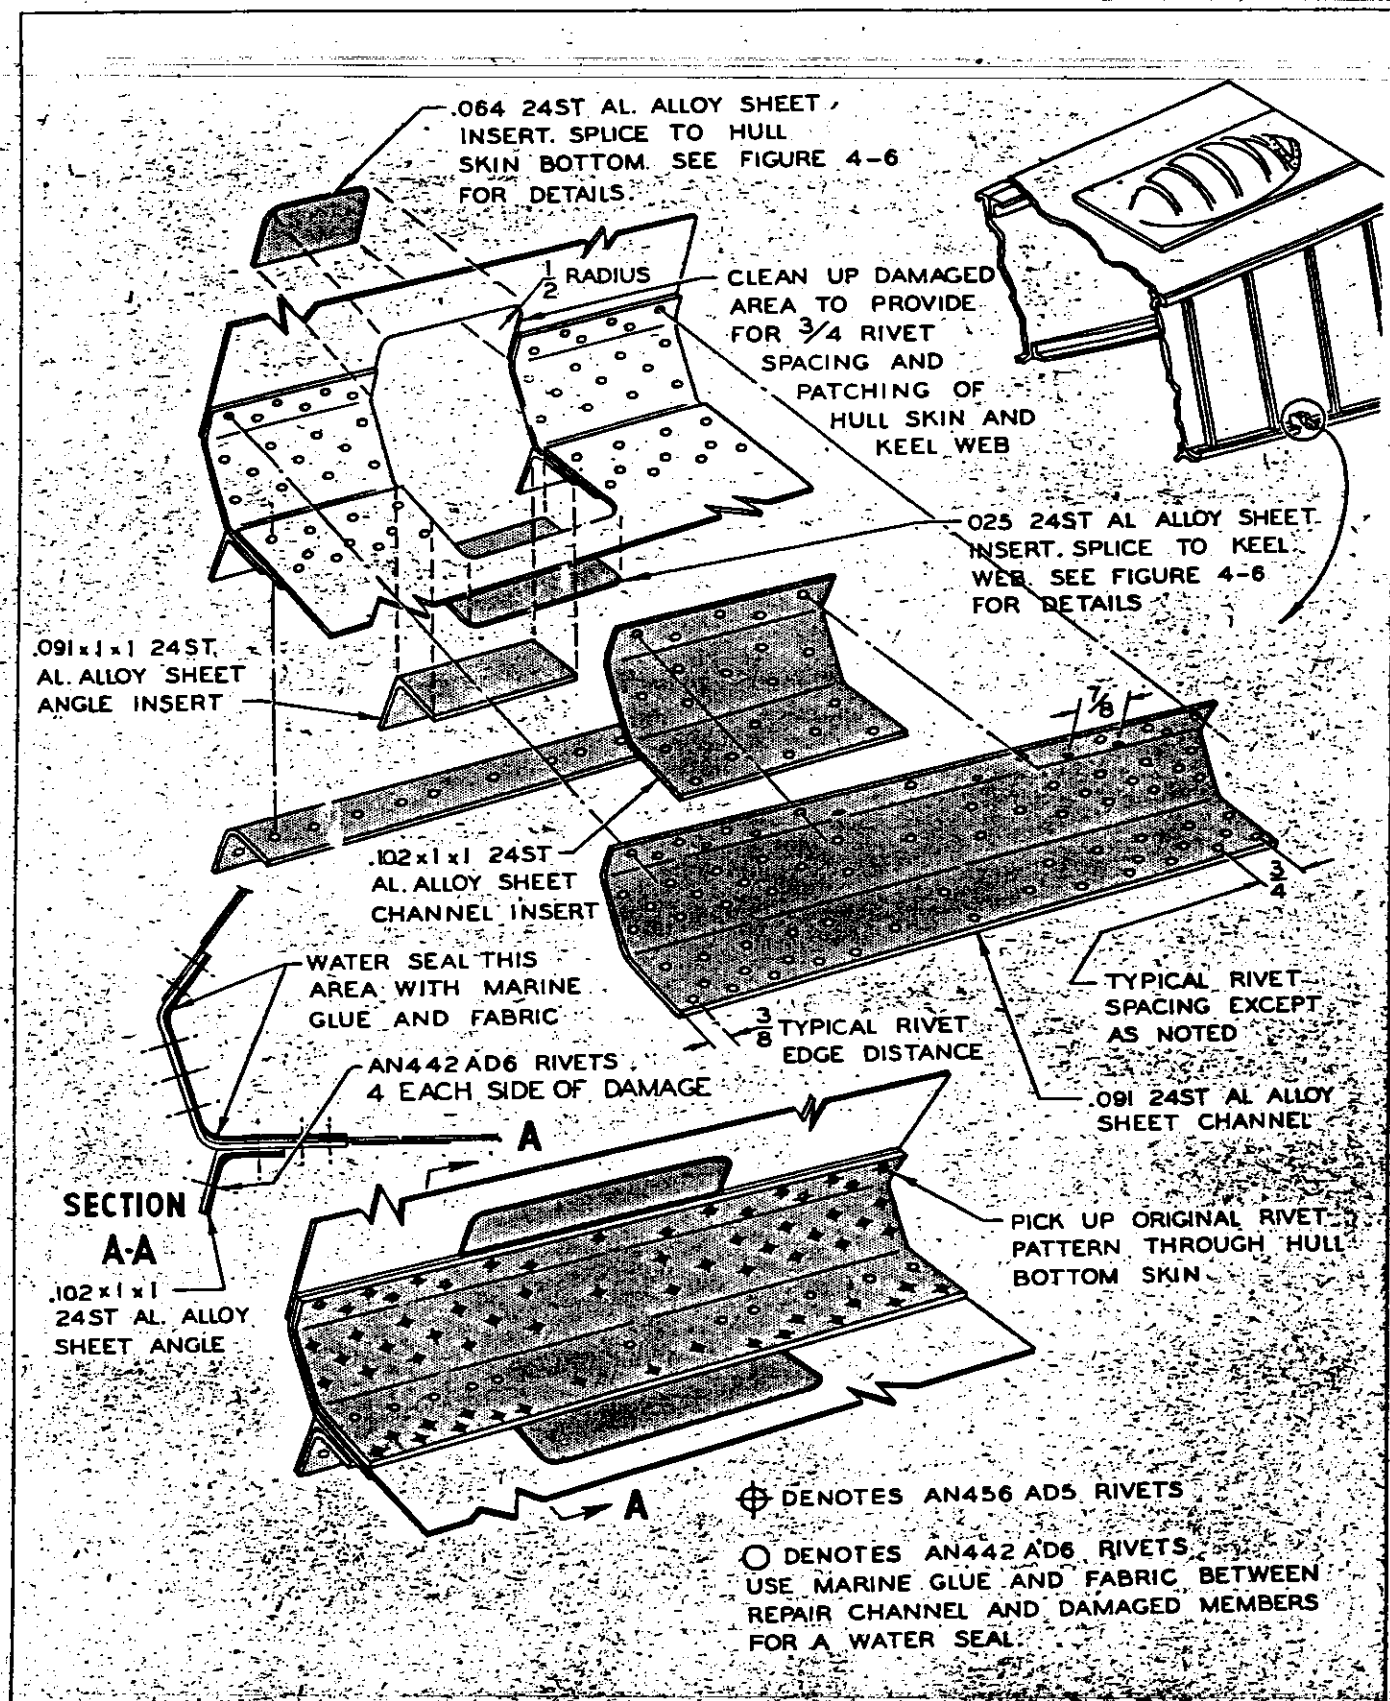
(Sheet 1 of 2 Sheets)—Twin Keel Repair
